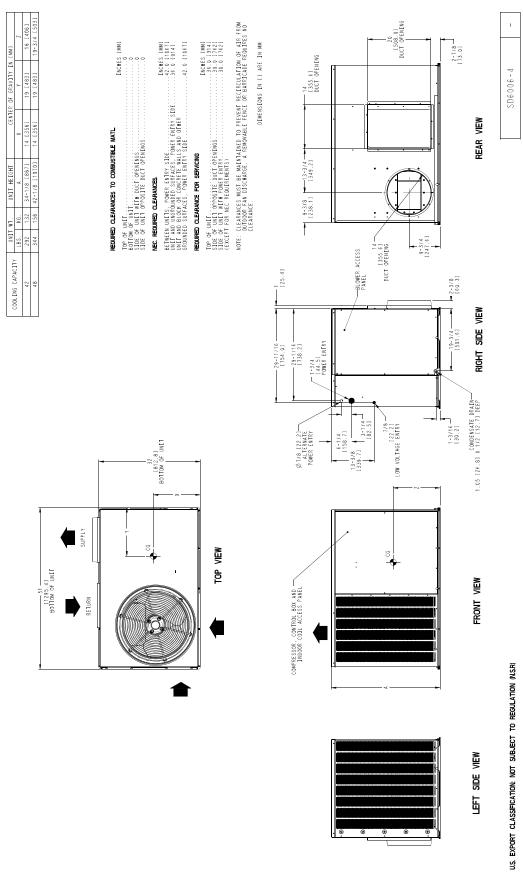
Unit Base Dimensions, PA5Z 042-048
